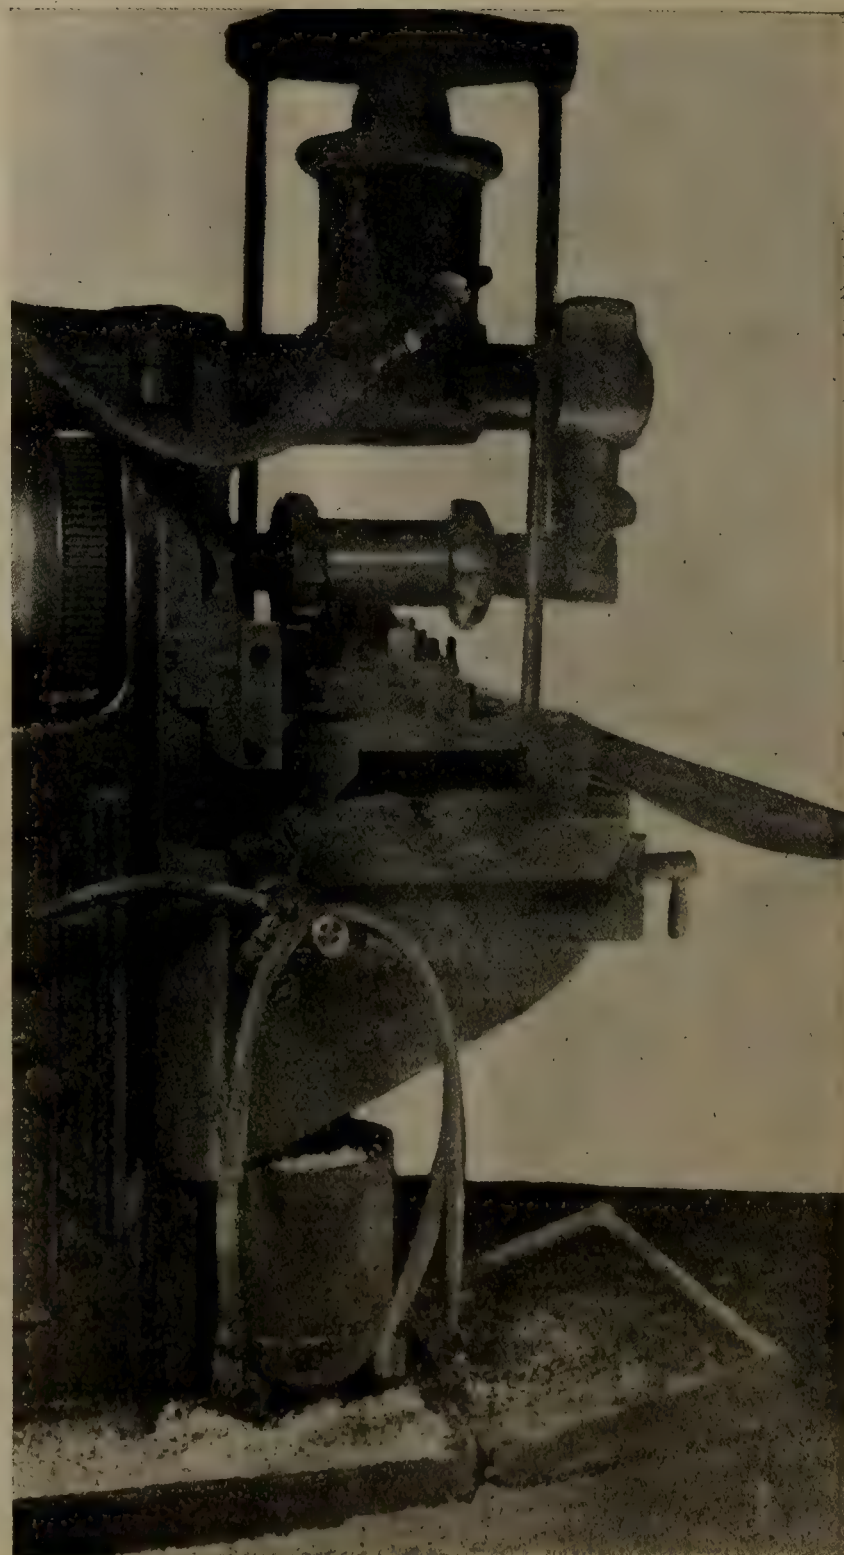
Arrangement of Milling Machine for Car Journal Brasses.
